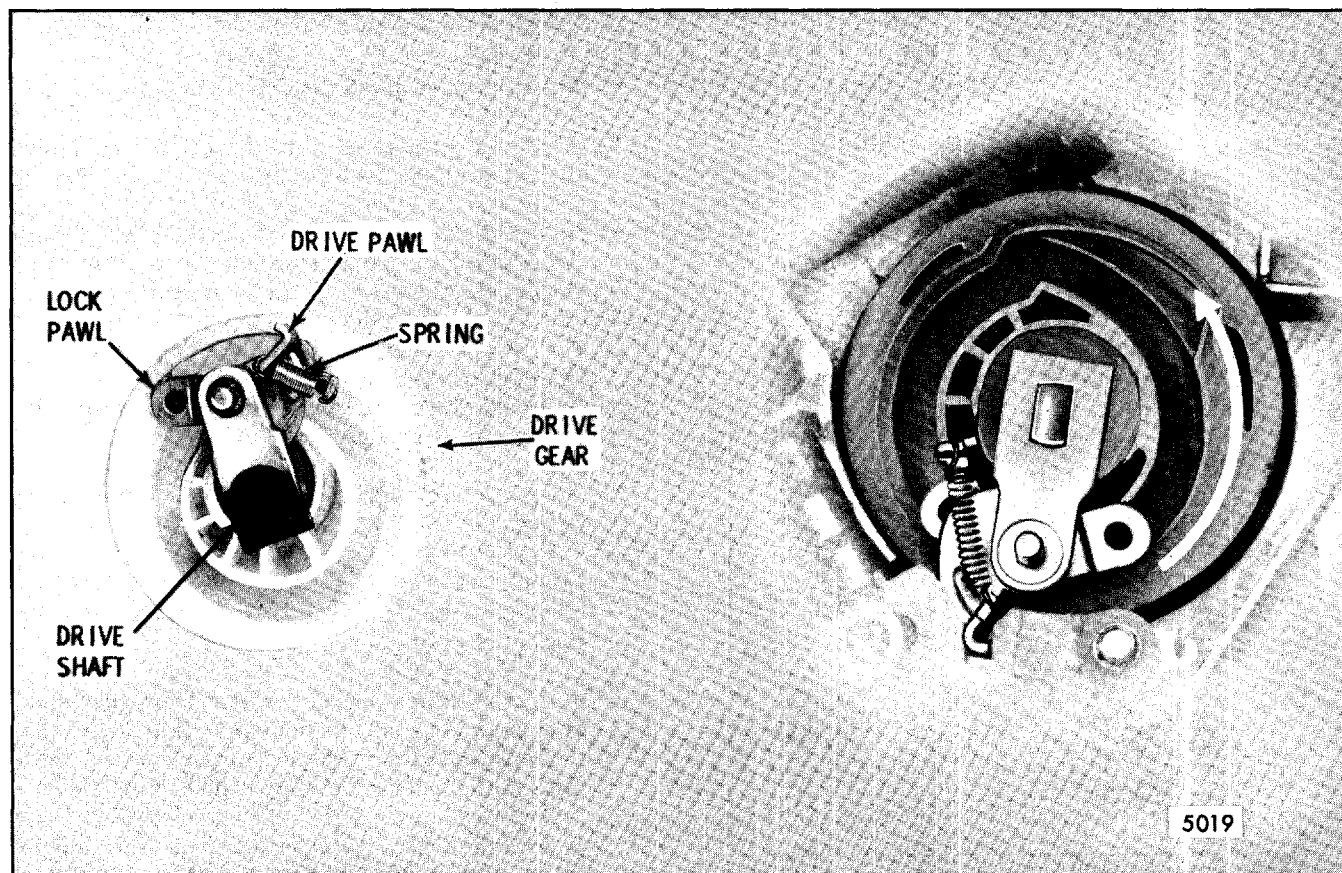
Lock Pawl and Drive Pin Positioning
